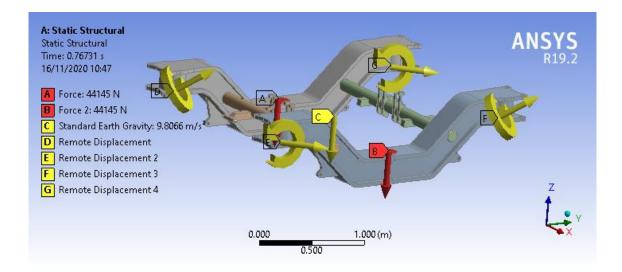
Boundary and unloading forces for structure steel S235, view 2.
